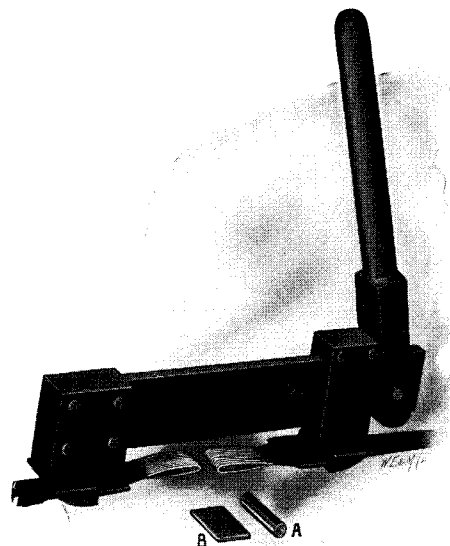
TOOL FOR ASSEMBLING SECTIONAL BAND, OPEN POSITION
